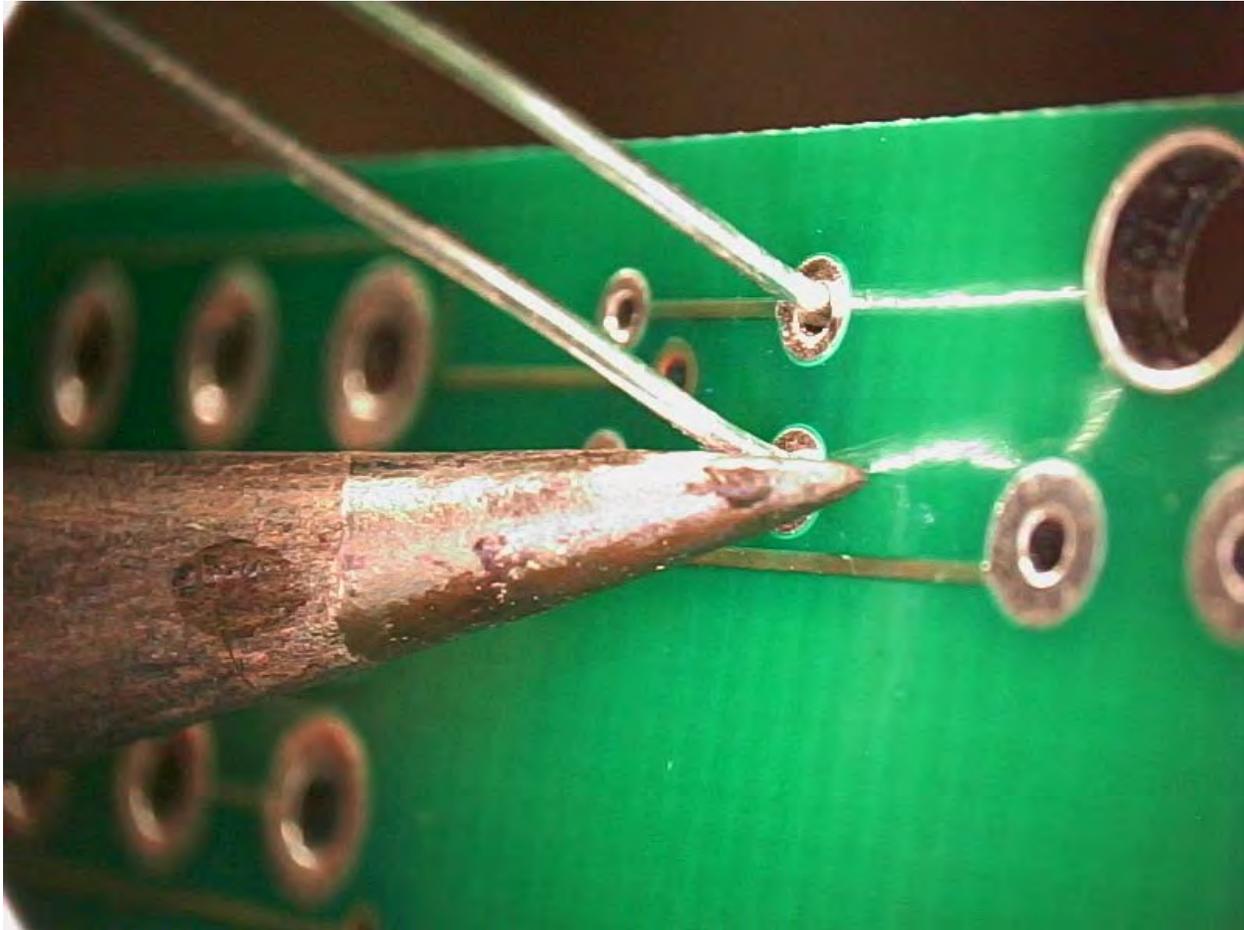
Hold the Soldering Iron Tip Under the Lead
